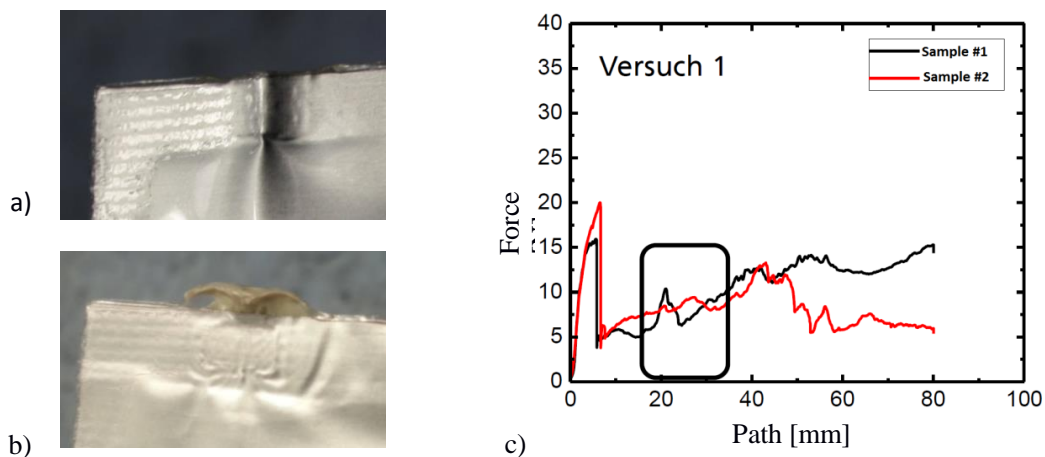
a) pre-sealed port; b) completely sealed port; c) tensile test 1 with completely sealed port
